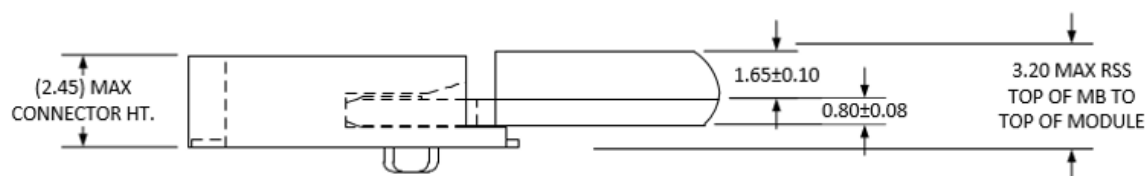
S4- Stack-up Top Mount Single-sided Add-in Card for 1.75 Maximum Top-side Component Height and with Higher Clearance above Motherboard
